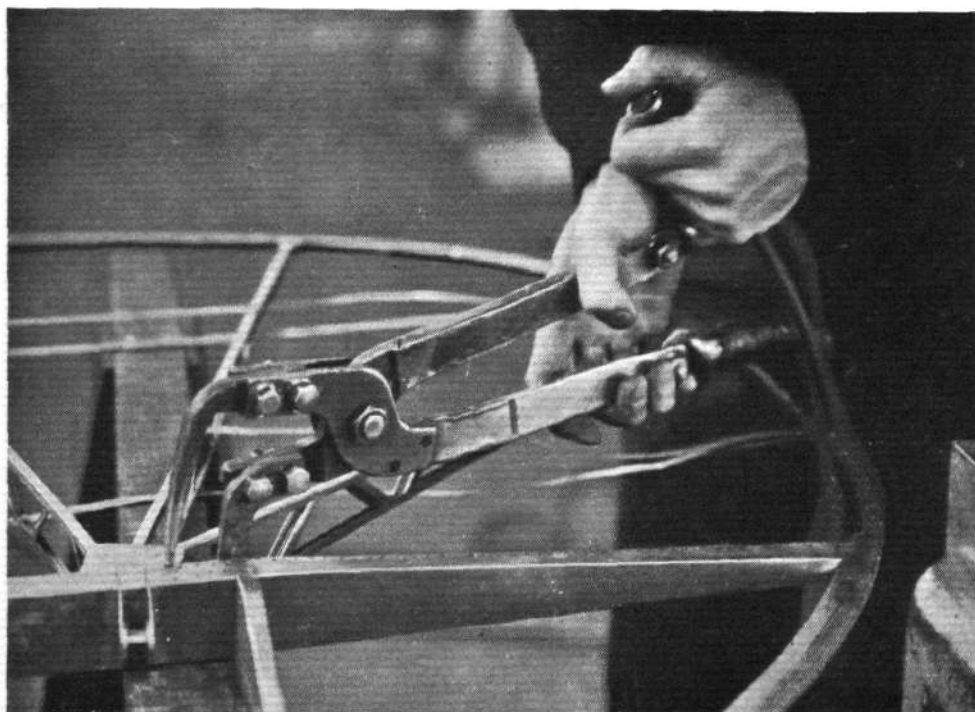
, HAND WELDING TONGS : The appearance of the shot welds can be seen.
